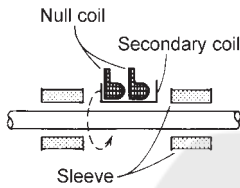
Coil assembly for the inspection of steel bars by the eddy current system. Dimensions in inches. Source: Ref 1
